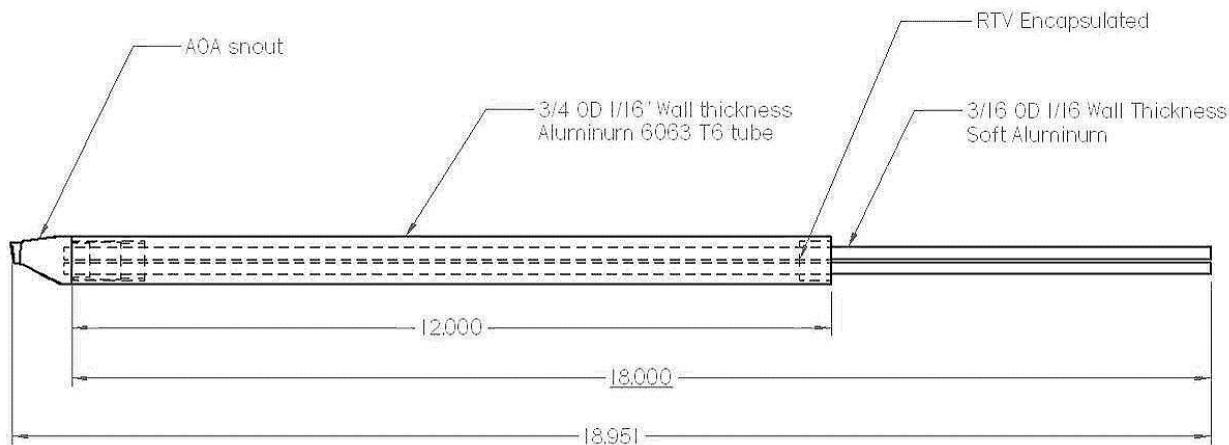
Boom Mount AOA/Pitot Probe Dimensions
